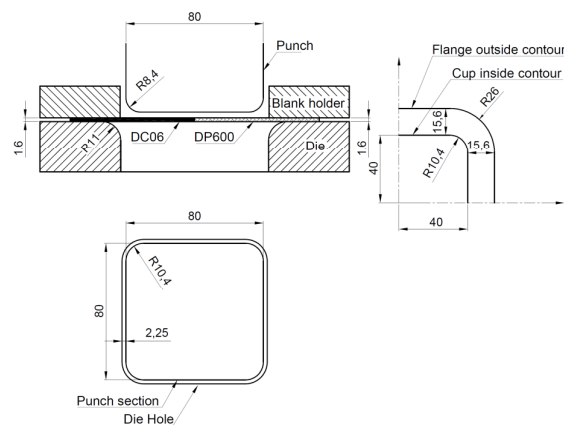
Forming tool geometry for square cup drawing with dissimilar materials and the desired part shape
